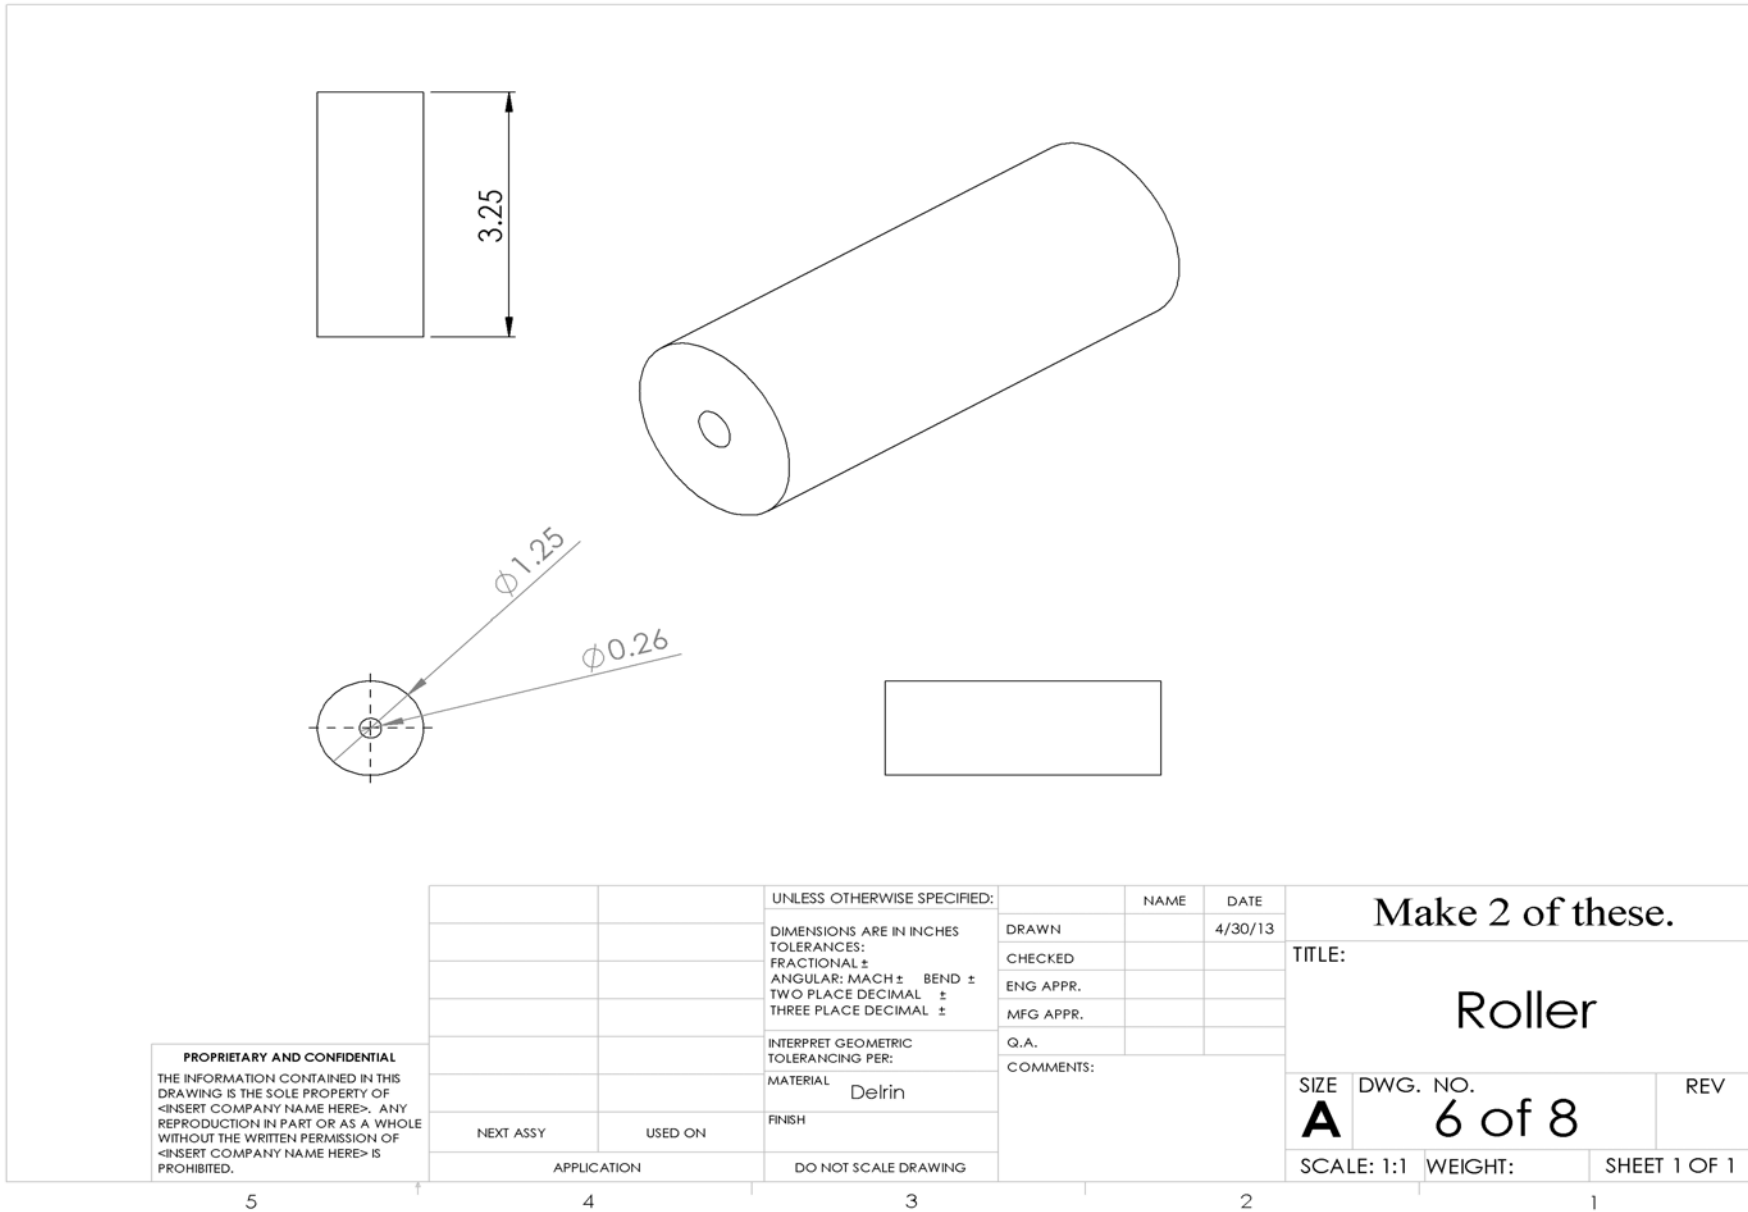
Roller*. This part will connect to the roller locks through the roller shaft and will roll on the tubes freely, squeezing them and causing water to move up the tubes.
